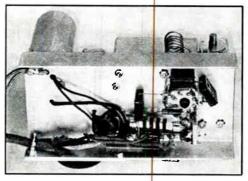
BELOW-CHASSIS WIRING OF THE METAL-TUBE CONVERTER
